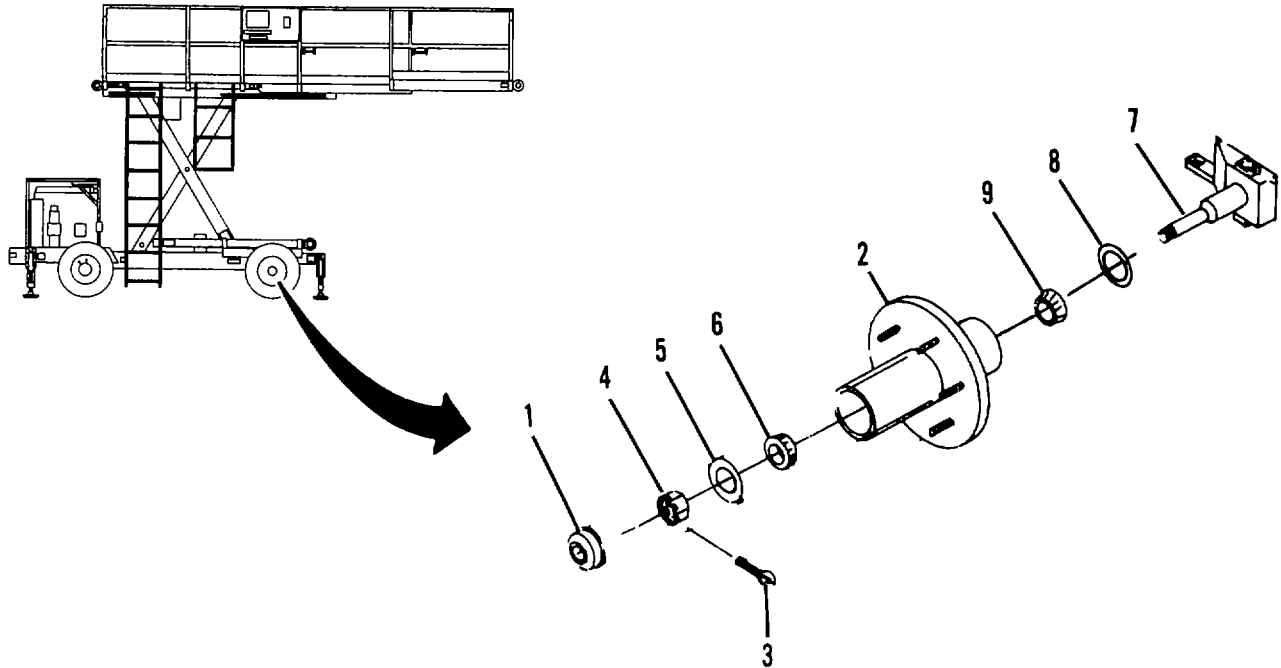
Steering Wheel Hubs and Bearings (Sheet 1 of 2).
